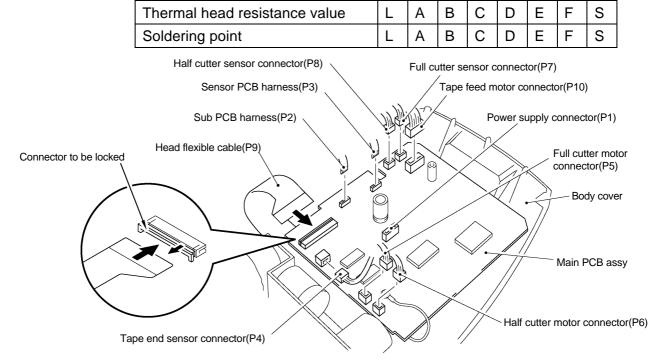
Attaching the Head Flexible Cable with Tape
